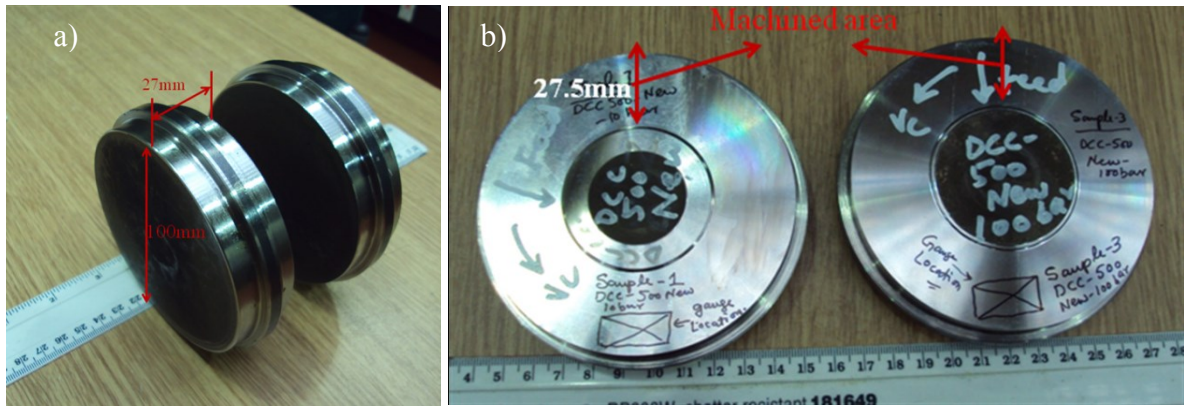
a) Disc specimens for deep hole drilling method and (b) sample showing the machined area
